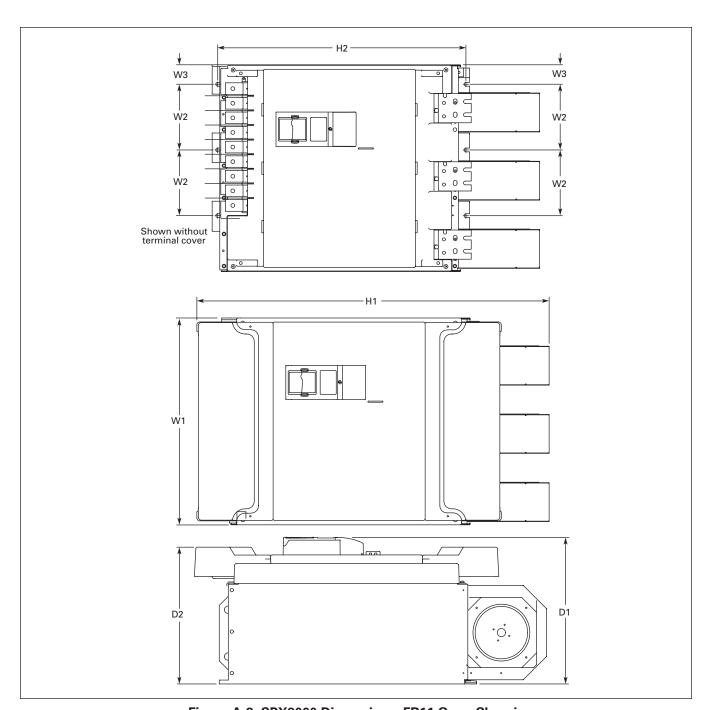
SPX9000 Dimensions, FR11 Open Chassis
